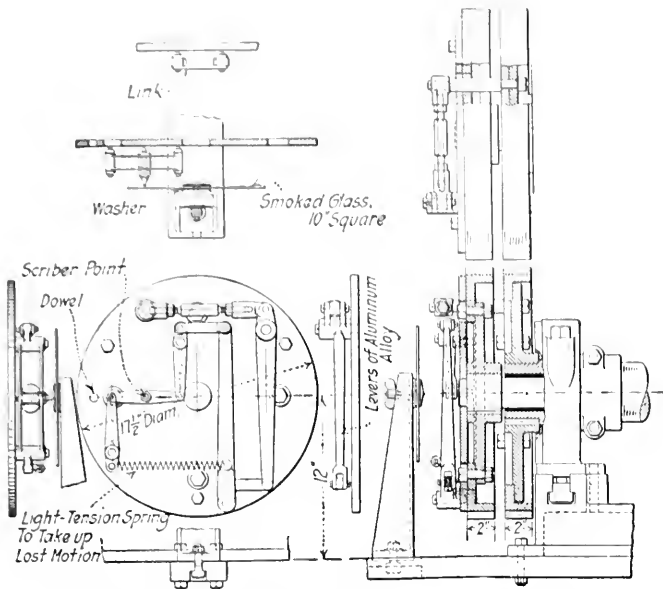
RECORDING MECHANISM FOR USE ON GEAR-TESTING MACHINE
